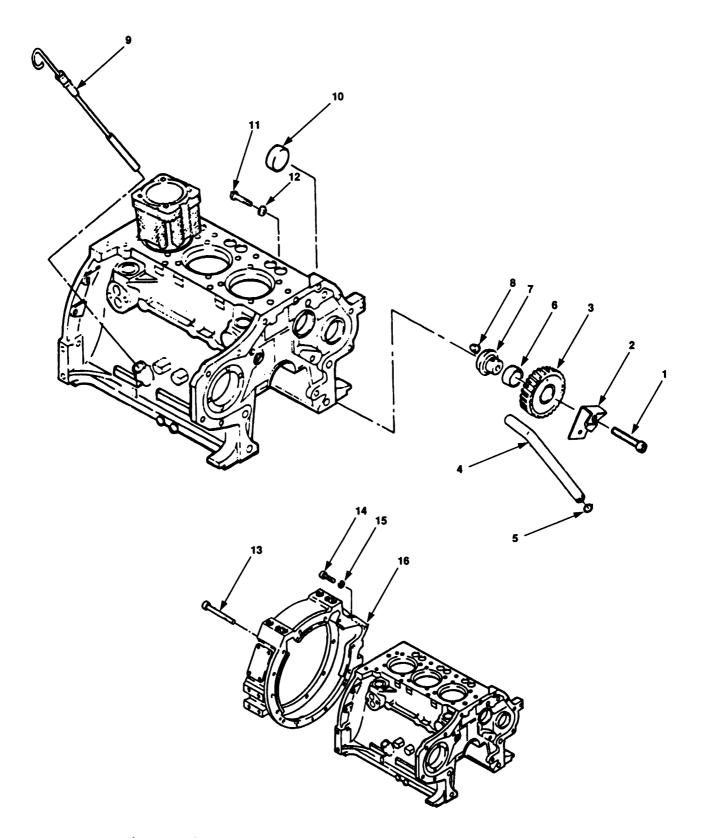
Idler Gear and Housing Adaptor Removal.
